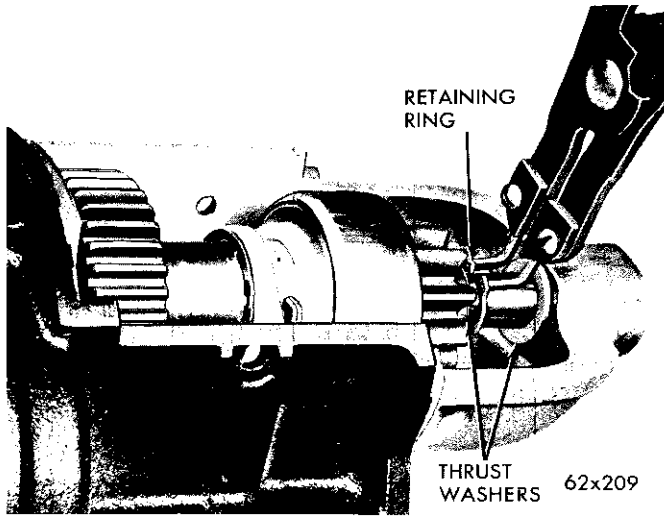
Removing or Installing the Pinion Shaft Retainer Ring
